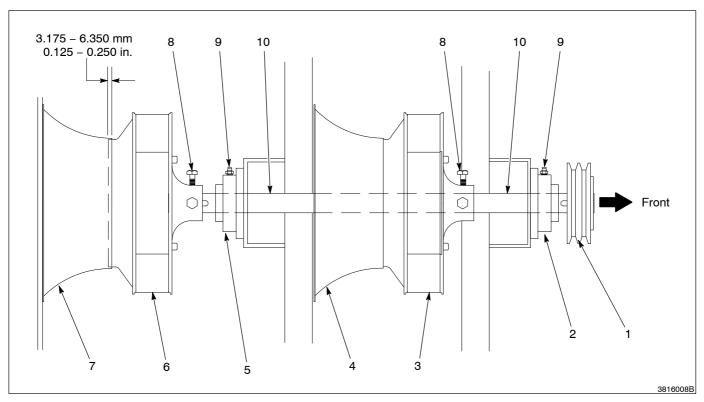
Fan, Fan Shaft, and Bearing Replacement
